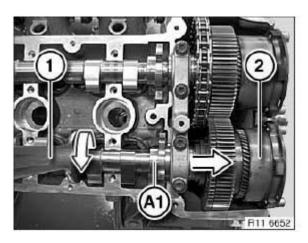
Rotating Exhaust Camshaft With Open-End Wrench Courtesy of BMW OF NORTH AMERICA, INC.
